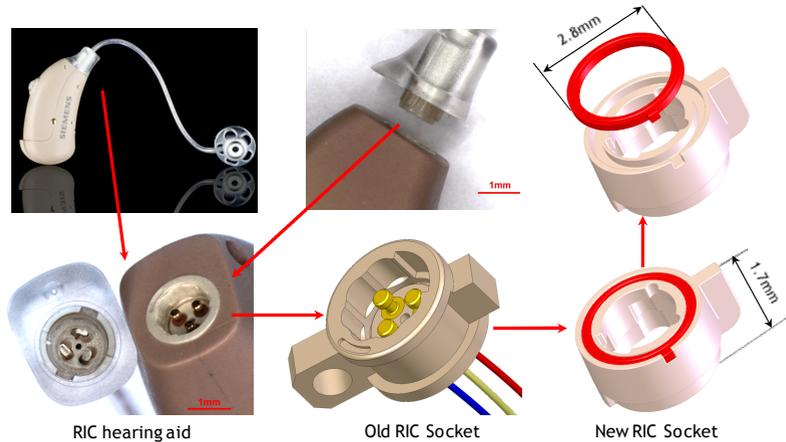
Schematic representation of RIC hearing aid, RIC connection (Plug-Socket combination), Old design of RIC Socket and new design of RIC Socket.
